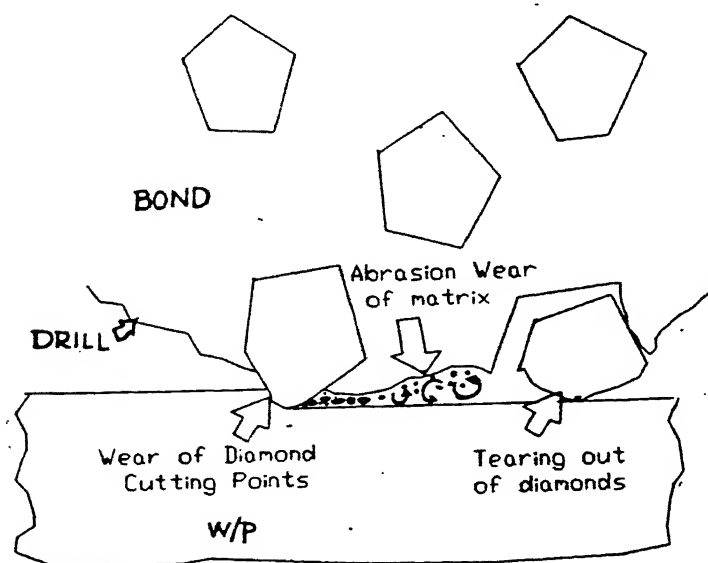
Penetration of diamond grains in work-piece surface[13].
